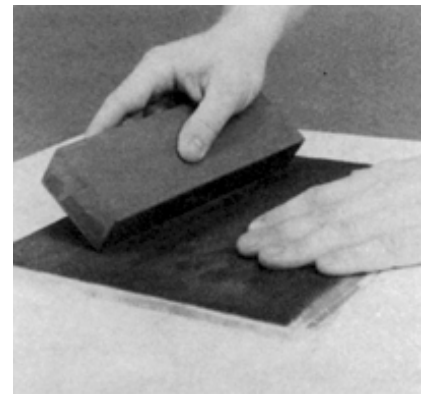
After the water stone is flat, bevel the edges as shown.
